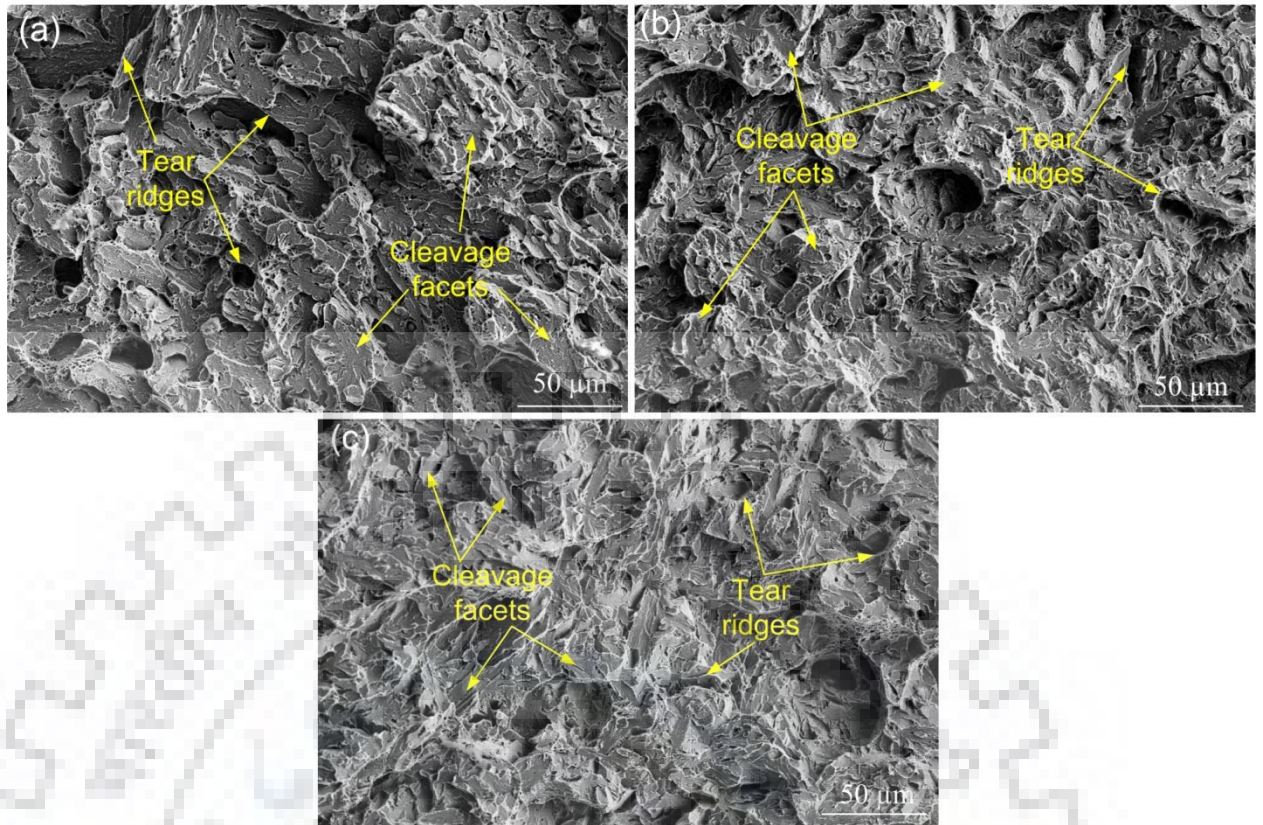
Fracture surface morphology after Charpy toughness tests (a) as-welded, (b) PWHT, (c) N&T
